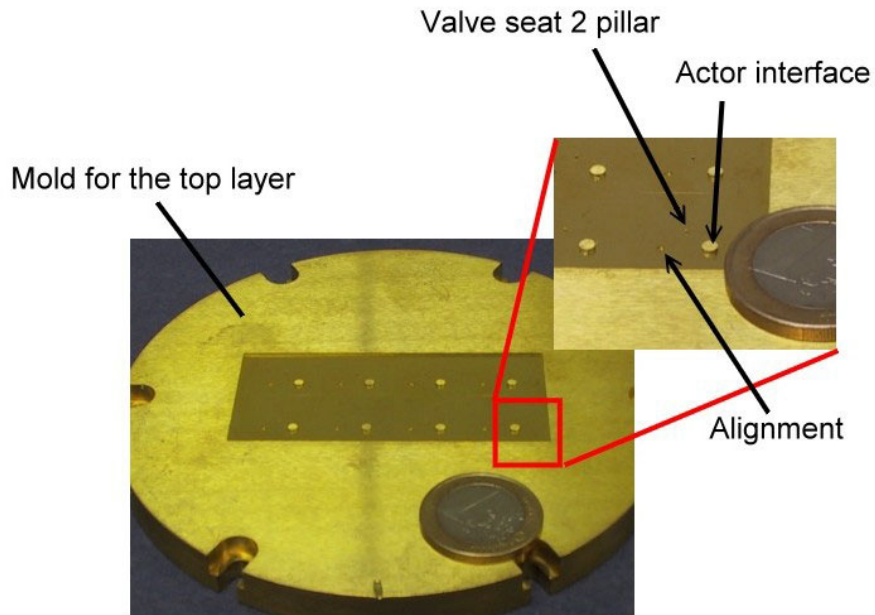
A hot embossing mold for the top layer of the micro ball valve was fabricated by CNC micro milling with tools made of tungsten carbide. The critical lateral dimensions were the valve seat 2 pillars with a diameter of 300 μm .
